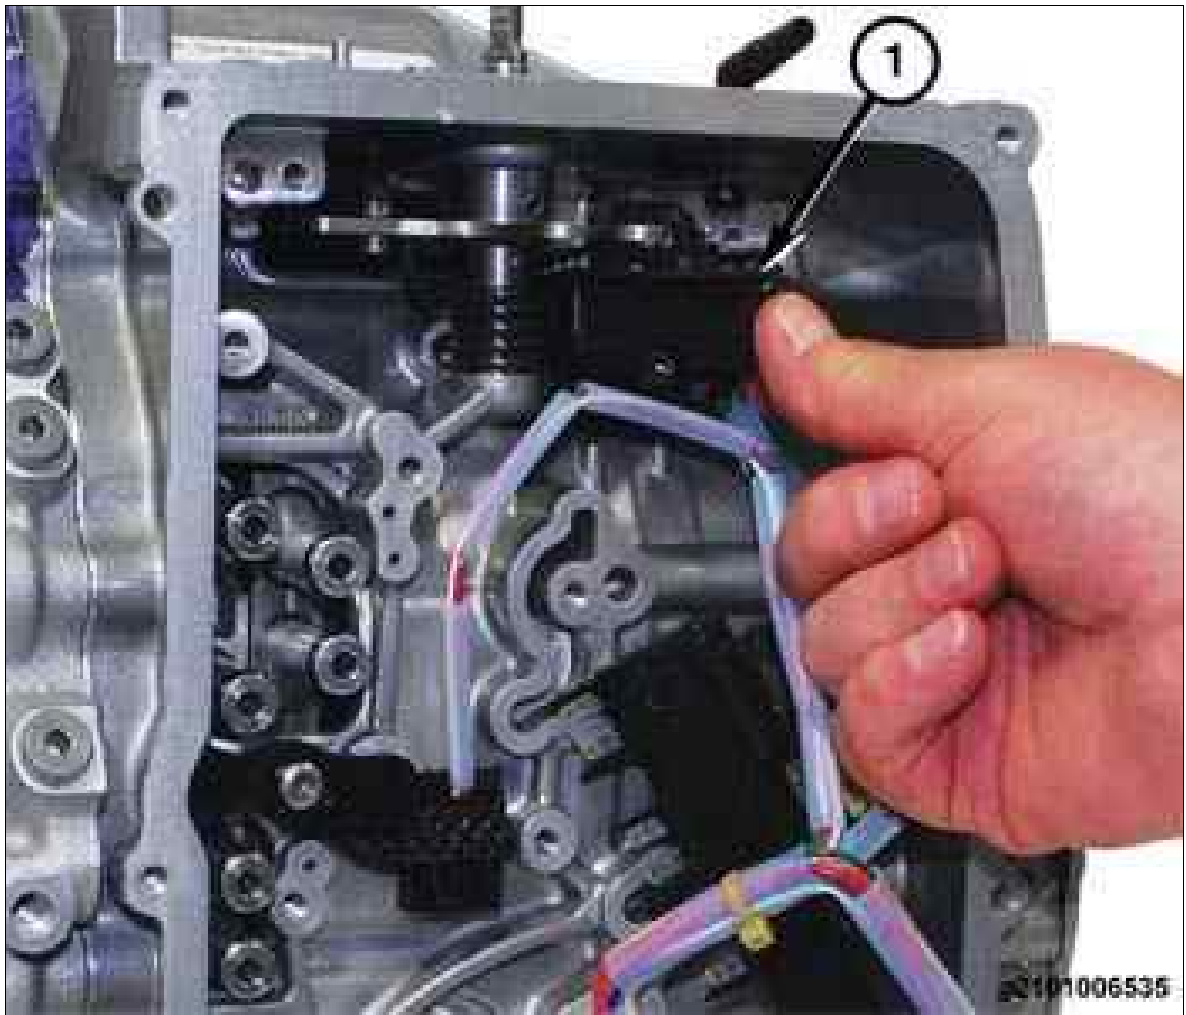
Removing/Installing Transmission Range Sensor (TRS) Screw
